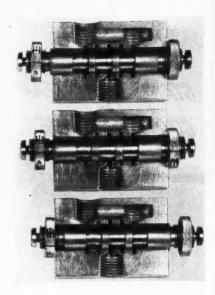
Cutaway view of Beckett Hi-Cyclic Air Valves showing piston in three positions. (Above) Piston at left. (Center) Piston in center. (Below) Piston at right.
